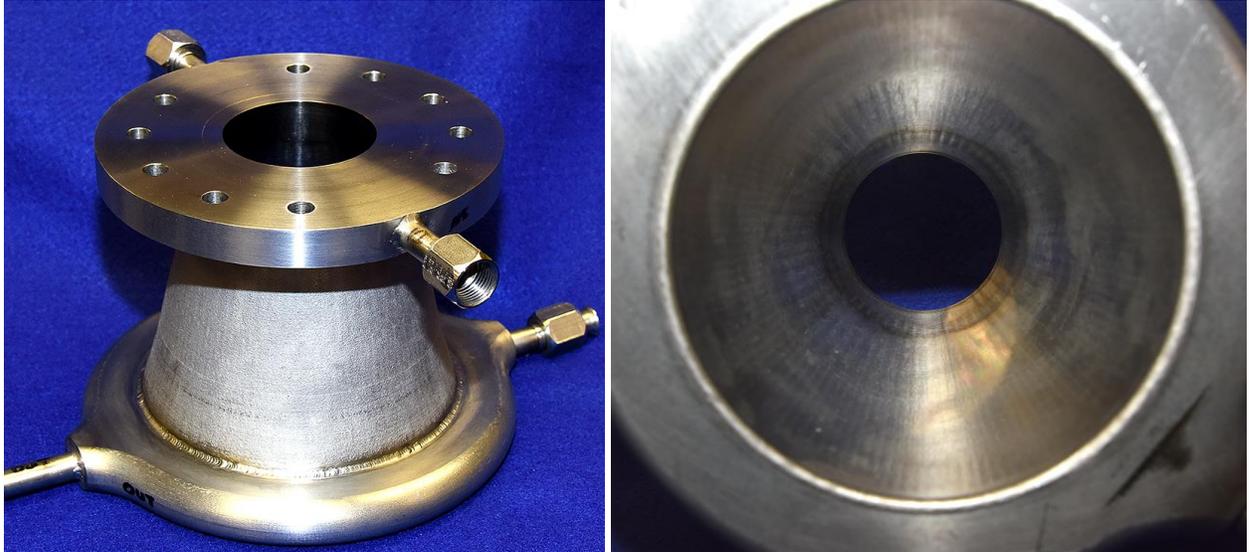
Completed Nozzle #3 Inconel 625: EB Welded Manifolds (left) & Final Machined Hotwall (right)
